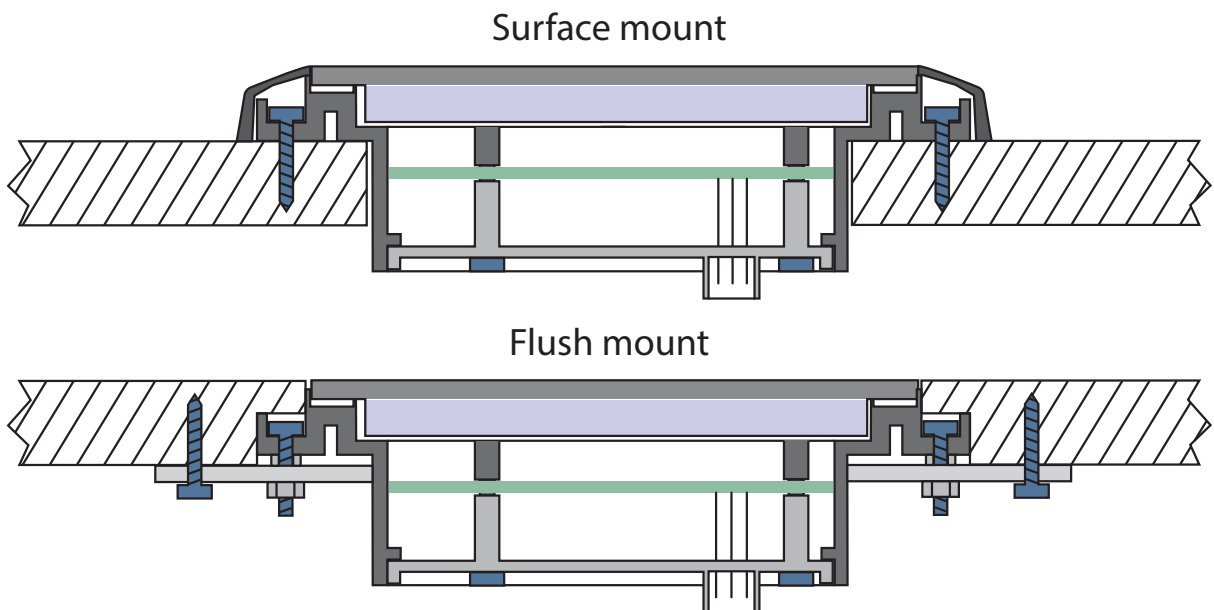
Mounting the device in surface mode is achieved by drilling a circular hole. The device is then lowered into the hole and attached using screws in the holes around the edge. Finally the bezel is attached with snap fittings. Flush mounting is achieved by milling out a L-shaped profile in a square hole in the dashboard and mounting the device from underneath.
